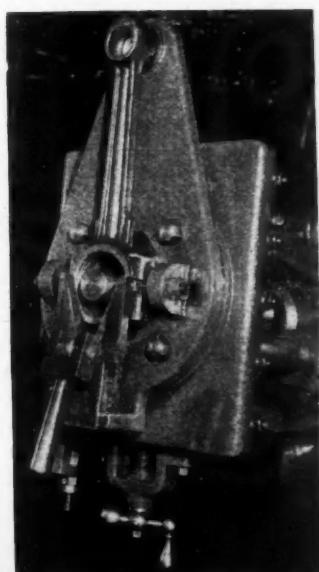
The connecting rod forging after being bored is placed in Wicaco grooving machine and a crossed and recrossed system of grooves are cut in the crankshaft end of the connecting rod. This insures perfect doweling and aids in the adhesion of the babbitt
